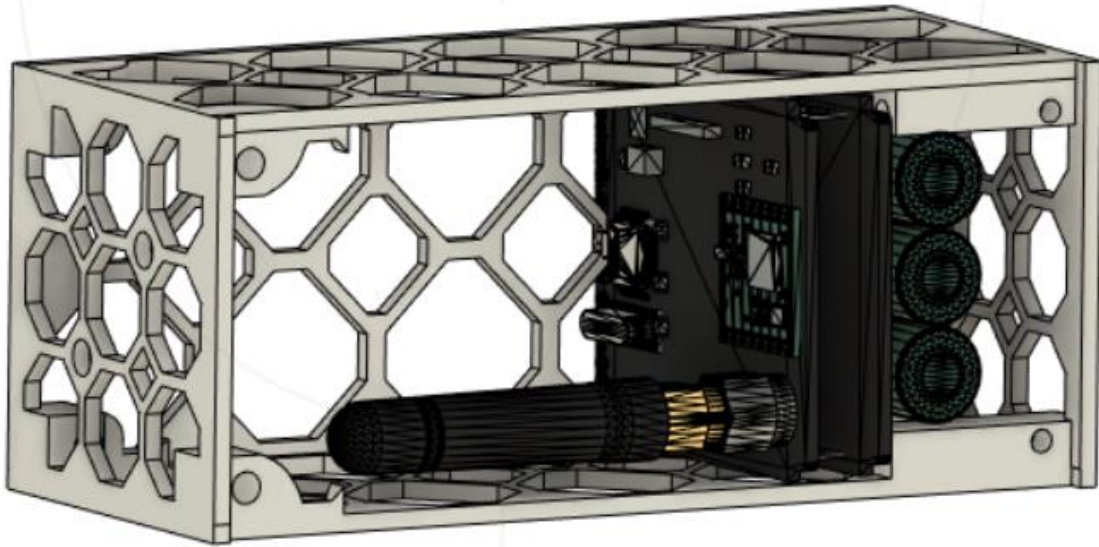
Model of the PocketQube 2p demonstrator with layered PCBs inside
